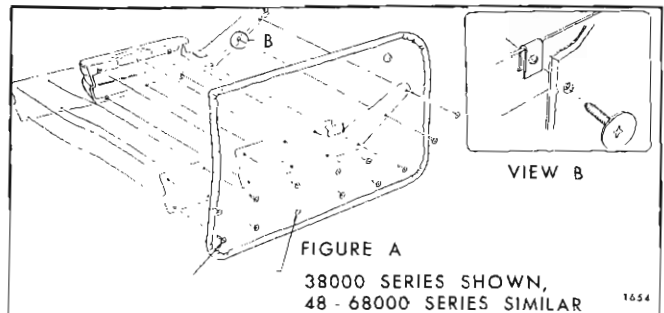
D22—Arm Rest to Door Trim Pad Installation
